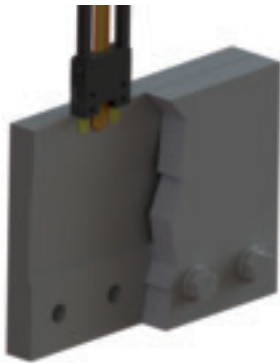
Measurement fixture (cutaway) in the process of measuring coater gaps
